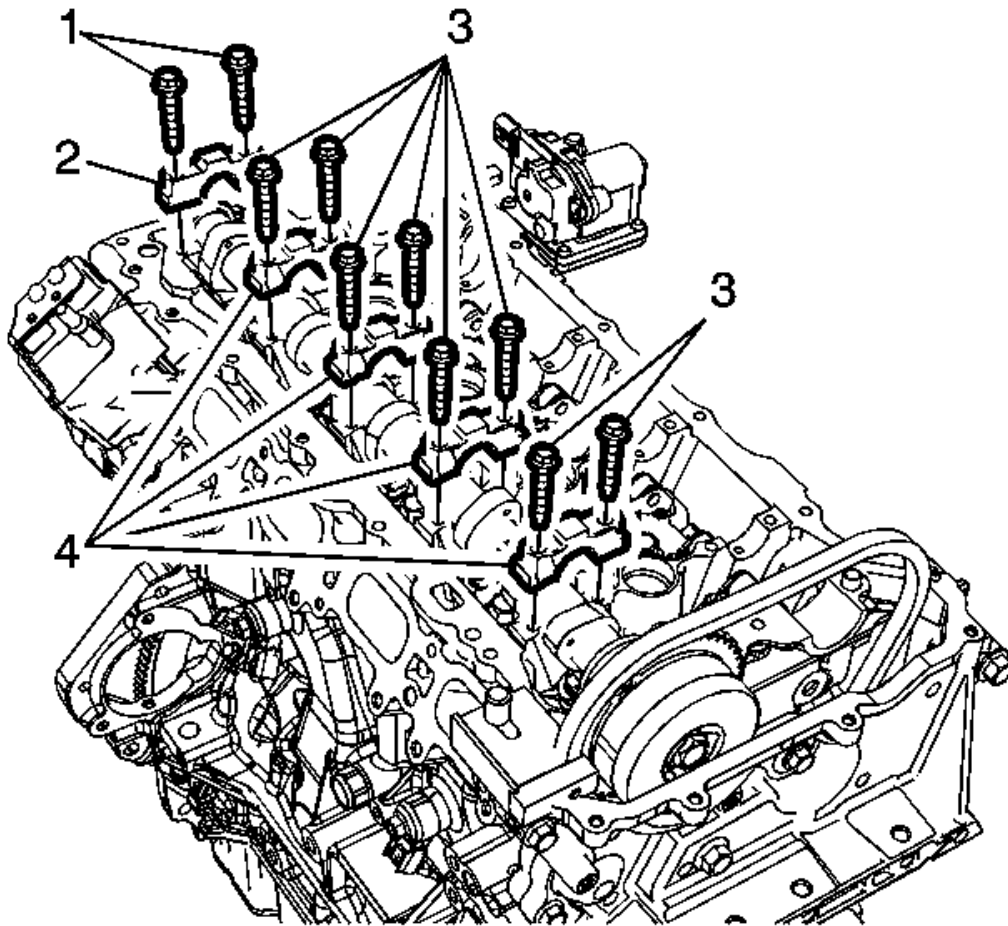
Intake Camshaft Bearing Rear Cap Bolts And Cap
